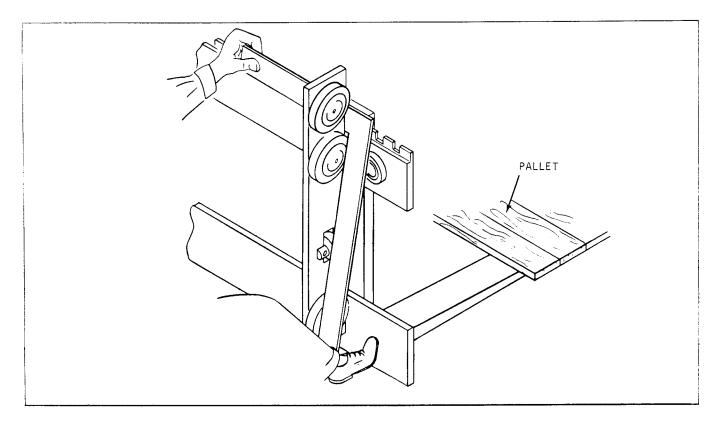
Squaring Carriage Rollers (Six Roller Carriage)
